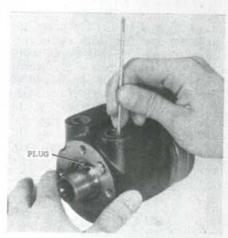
Use a brass welding rod with a 90° bend in one end to form a leg about 8 mm (5/16 inch) long to push check valve plug from valve body as shown.
